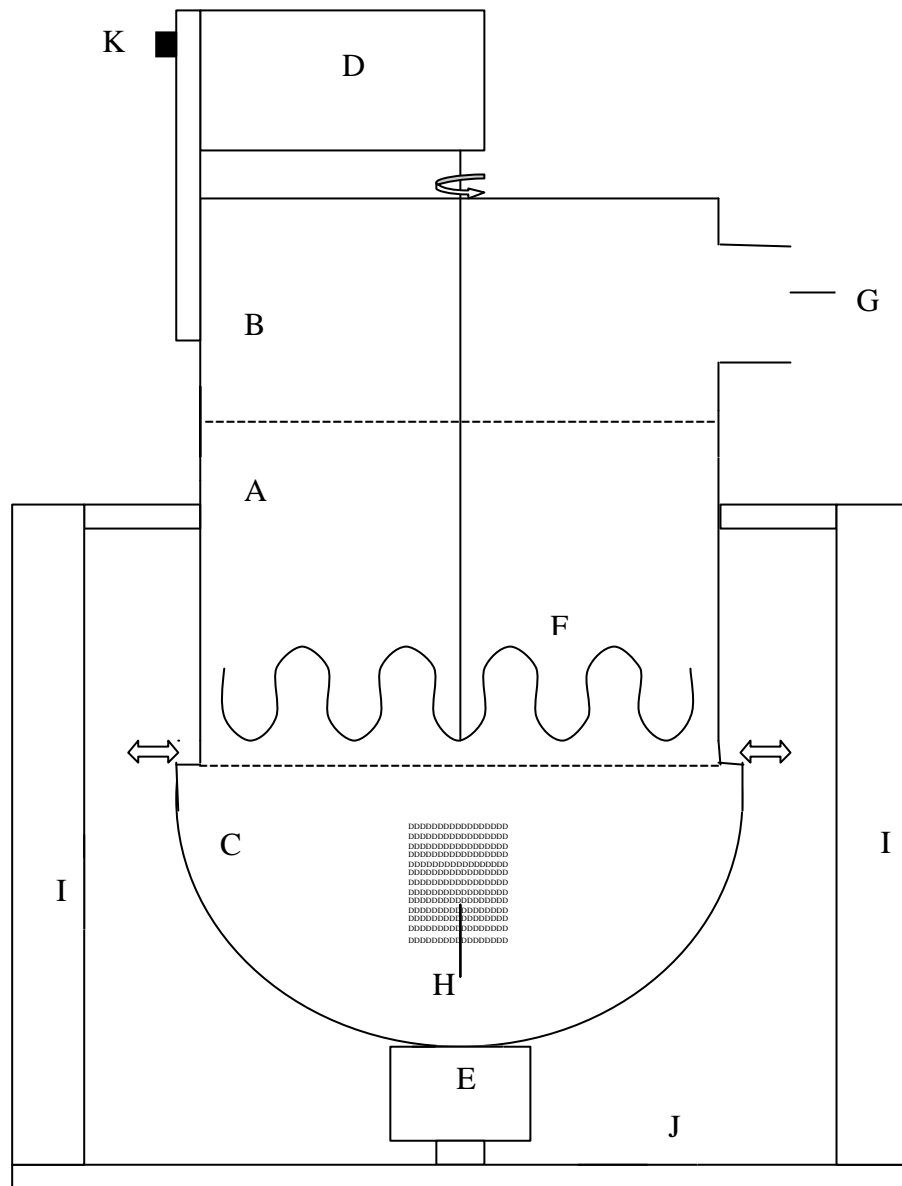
Schematic drawing of hull separator: (A) Feed vessel, (B) Top lid with air distributor, (C) Sieve with hull collecting box, (D) Electrical motor of agitator, (E) Electrical vibration system, (F) Sinusoidal wave-shaped blades, (G) Air in, (H) Air out, (I) Wooden blocks, (J) Base, (K) Control panel
